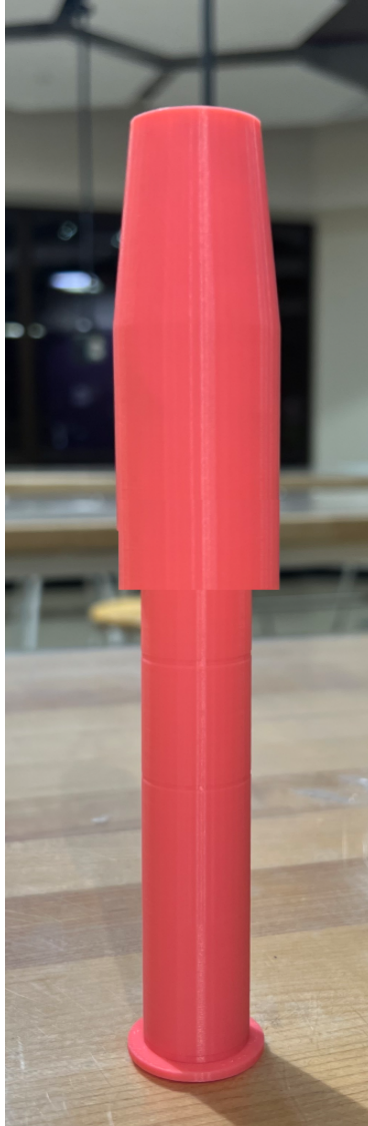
Final Prototype with the cap screwed on. All parts were made from 3D-printed PLA at the UW-Madison MakerSpace.
